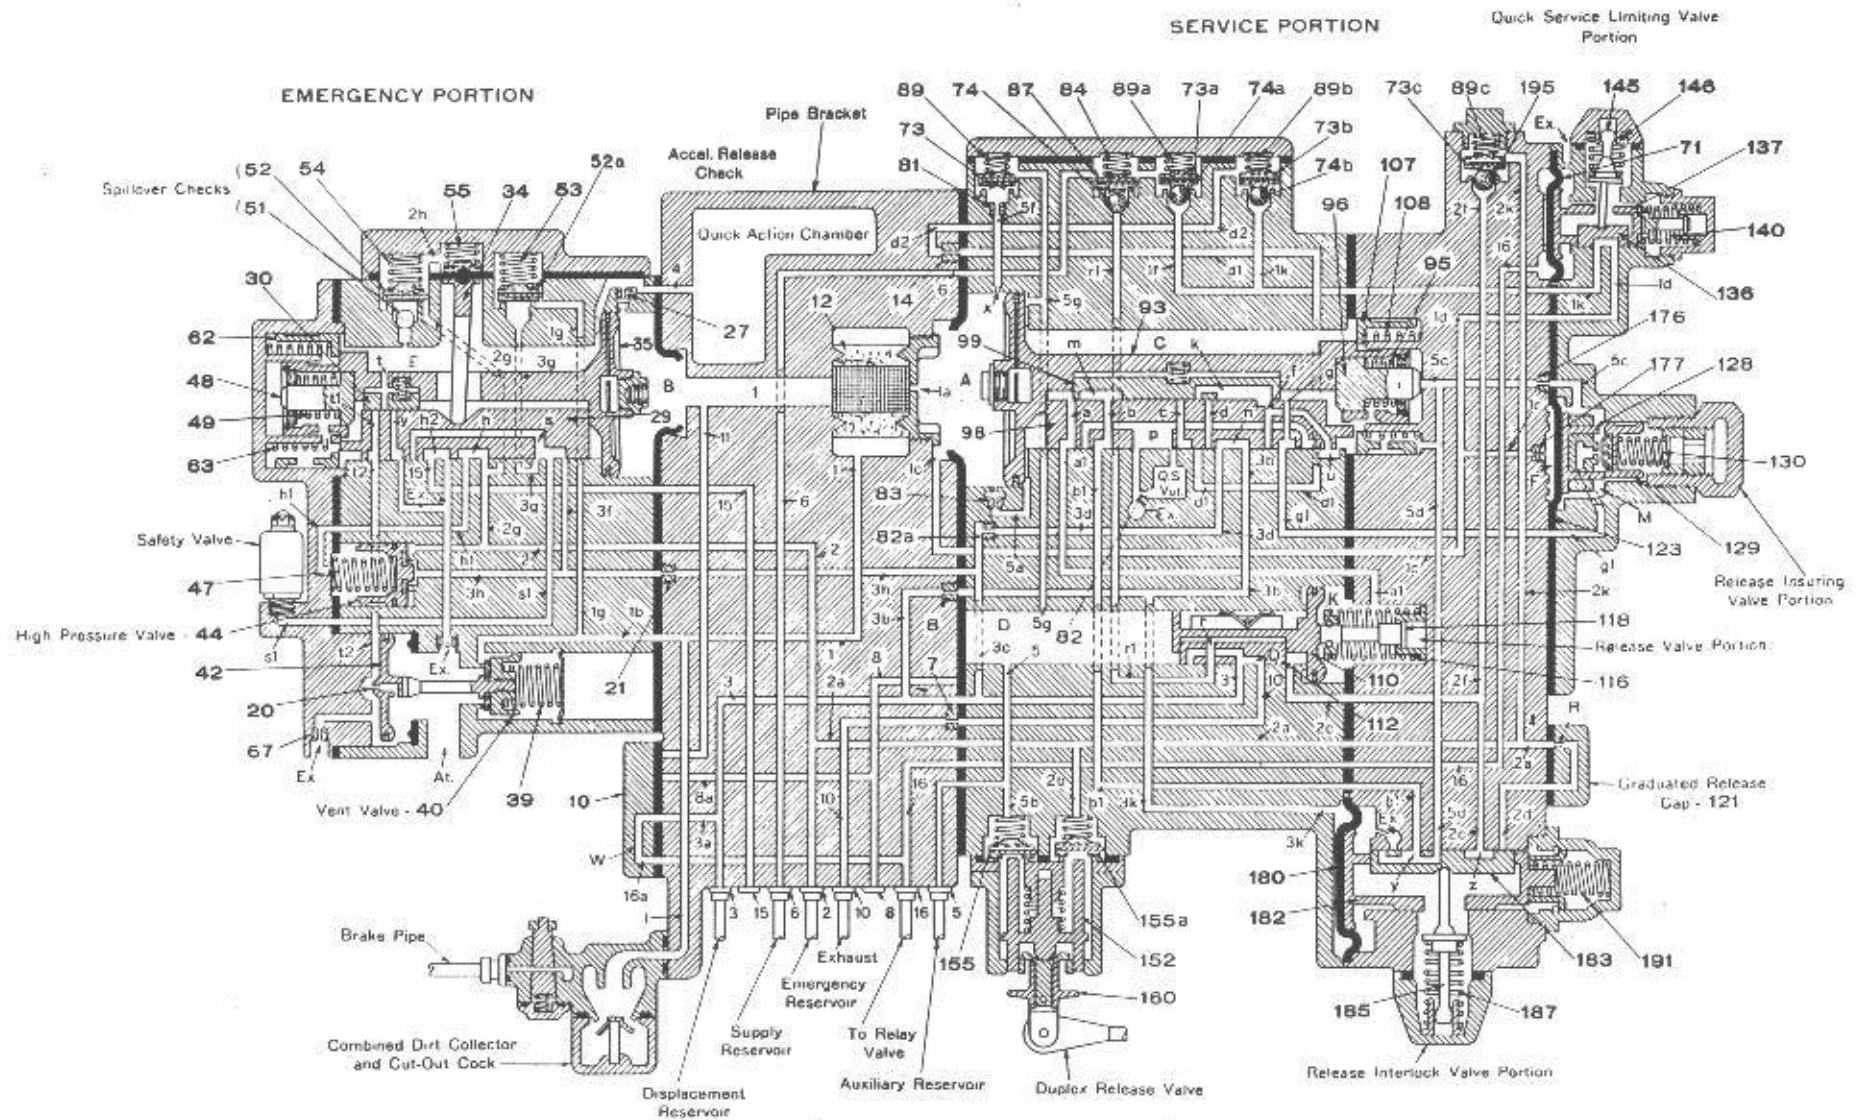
Plate I INITIAL CHARGING Position D-22-AR Control Valve
